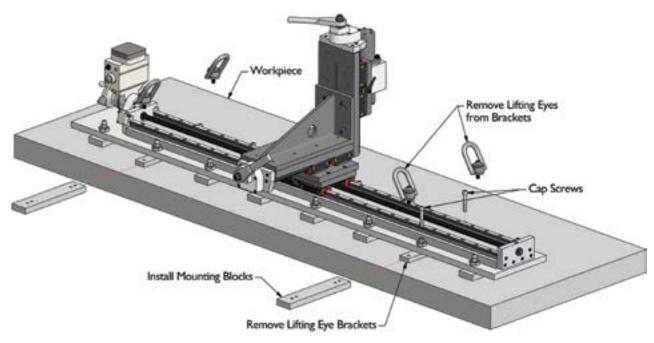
Remove Lifting Eyes and Install Mounting Blocks
